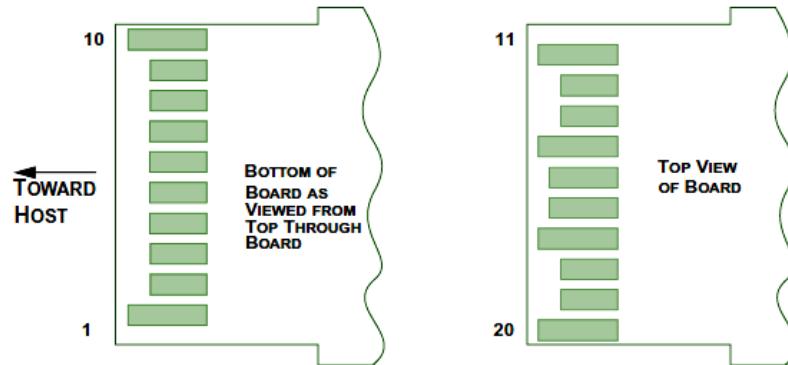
SFP Transceiver Electrical Pad Layout
